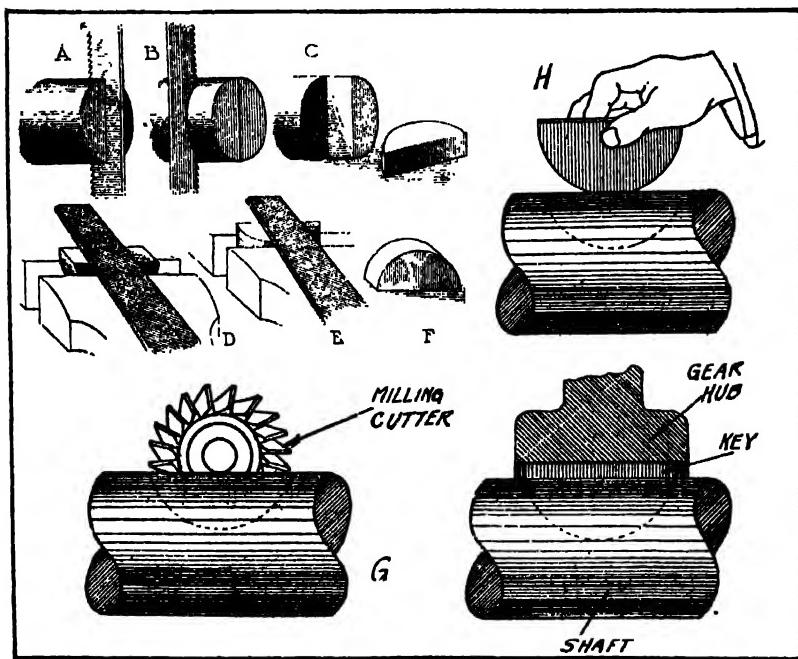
How to Make a Woodruff Key, Cut the Keyway and Method of Using.
